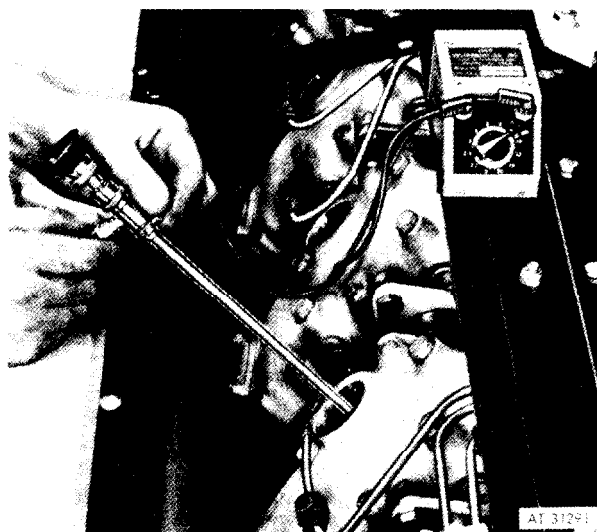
Borescope instrument in position for cylinder bore inspection.
